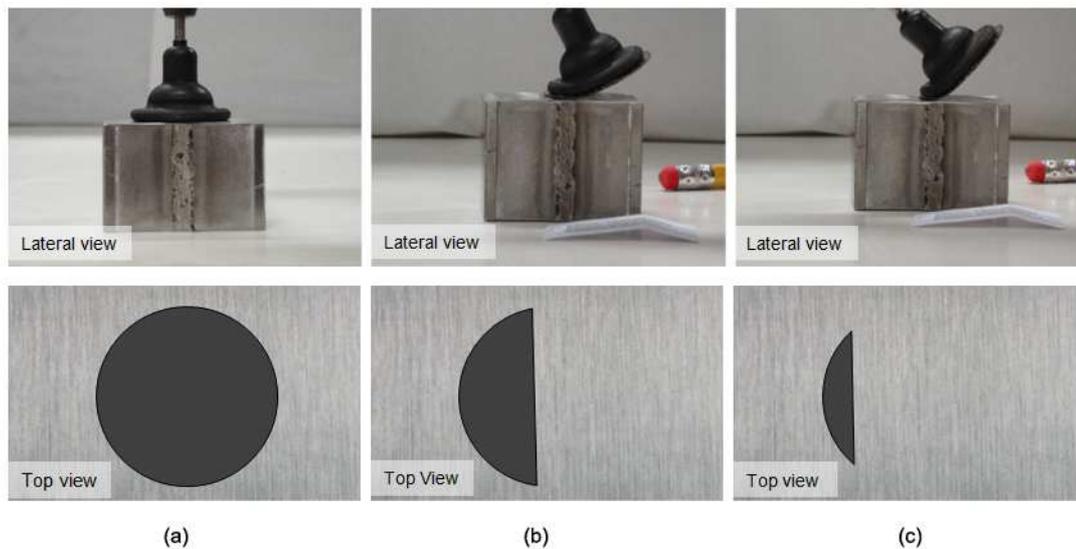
Tool disc when being pressed and inclined so it is (a) completely in contact with the material surface, and (b & c) partially in contact with the material surface.
